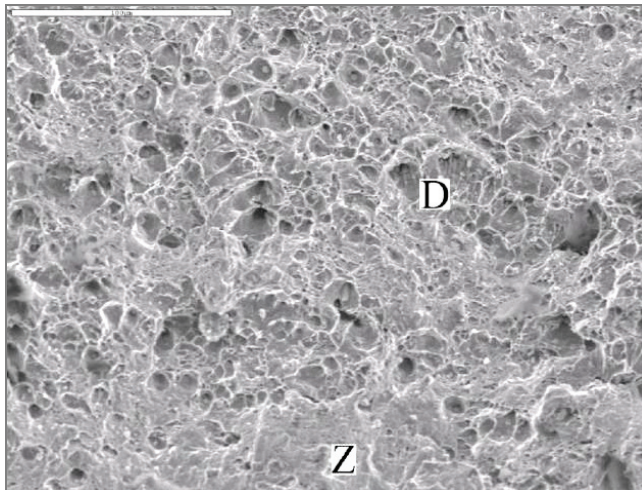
Sample A. The enlarged fragment of the topography of the fracture shown in Figure 17 that includes mostly its rapid fracture – D as well as a small part of the fatigue fracture – Z, which exhibits the character of ductile fracture. SEM
